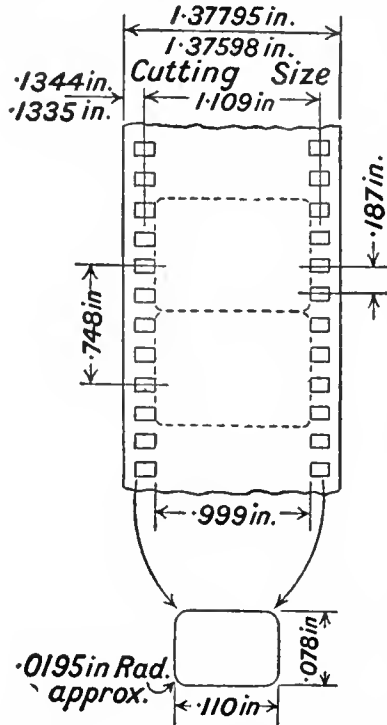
Standard dimensions of 35 mm. film. Specifications, with tolerances, allowed for cutting and perforating standard motion picture positive film.
